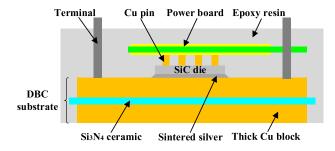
Package structure schematic of SiC power module with Cu pin.
